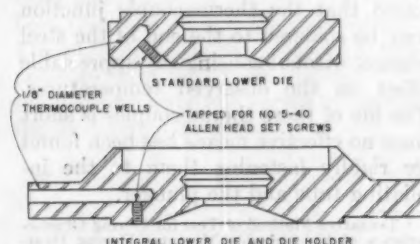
Location of Thermocouple Wells in Lower Dies.
